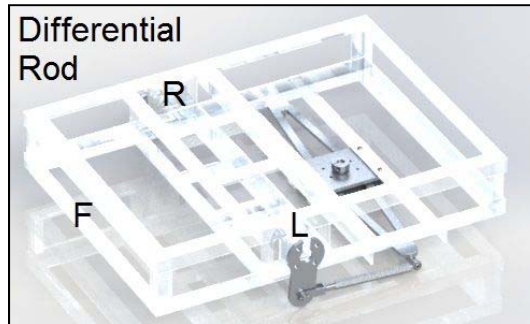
SolidWorks® render of the differential rod system mounted underneath the chassis to allow for mounting and open space on top of the chassis.
